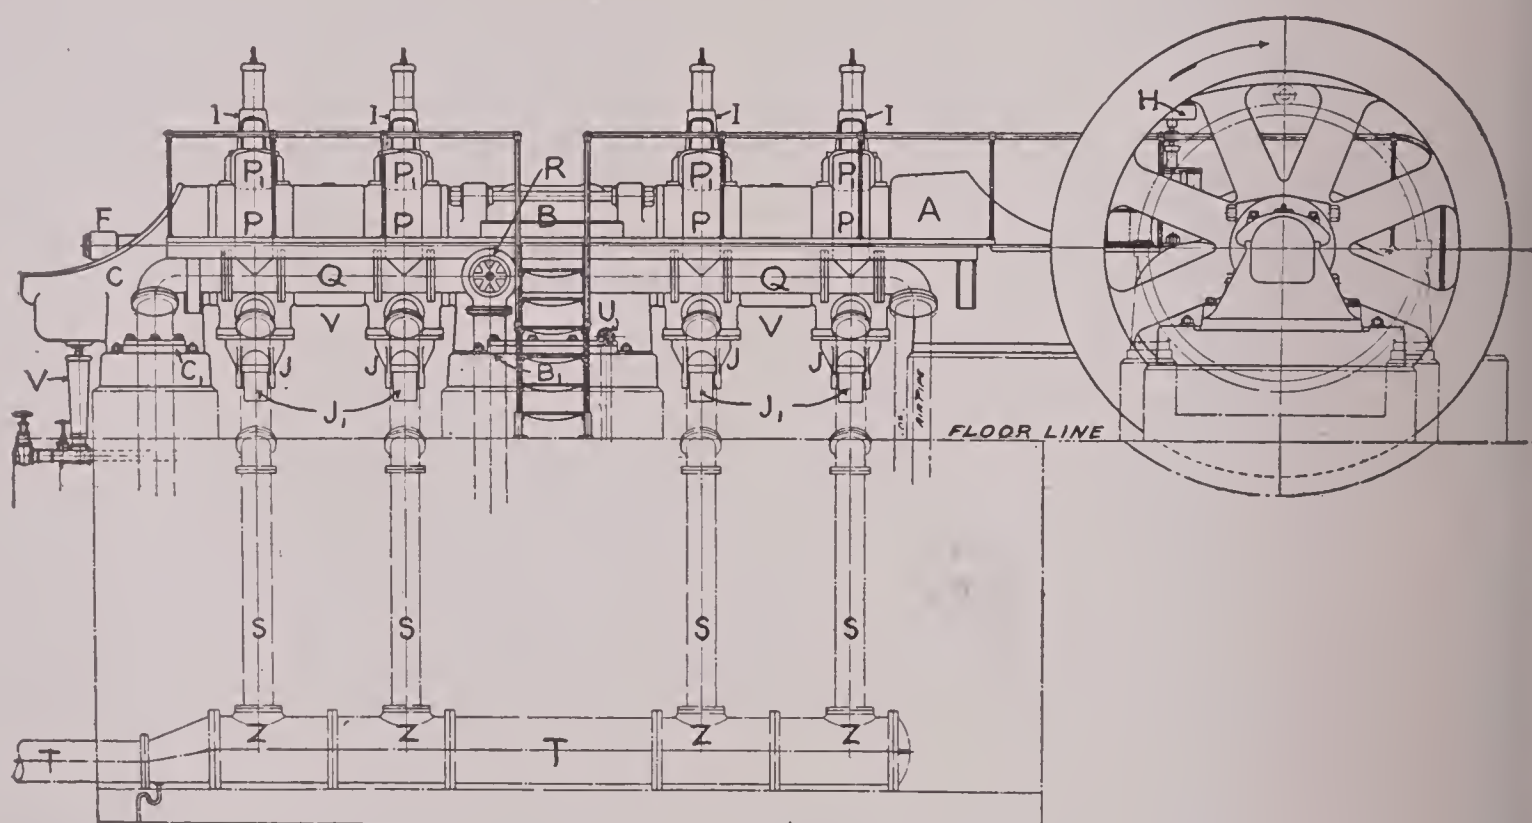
General Elevation, Westinghouse Horizontal Engine.
